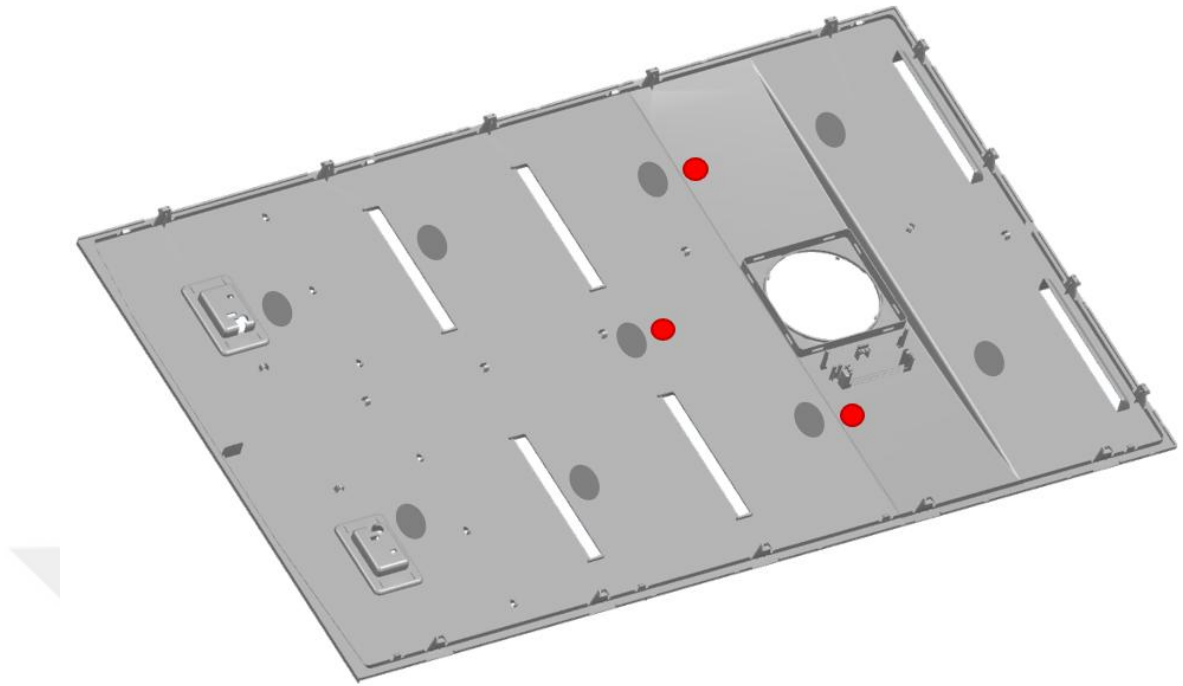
Placement of cavity pressure sensors on the refrigerator inner beyond cover with sensor locations marked in red and valve-gate positions highlighted in gray
